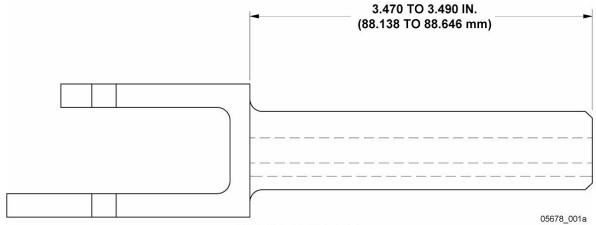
Pedal assembly modification 407-001-012-101FM (Sheet 2)
